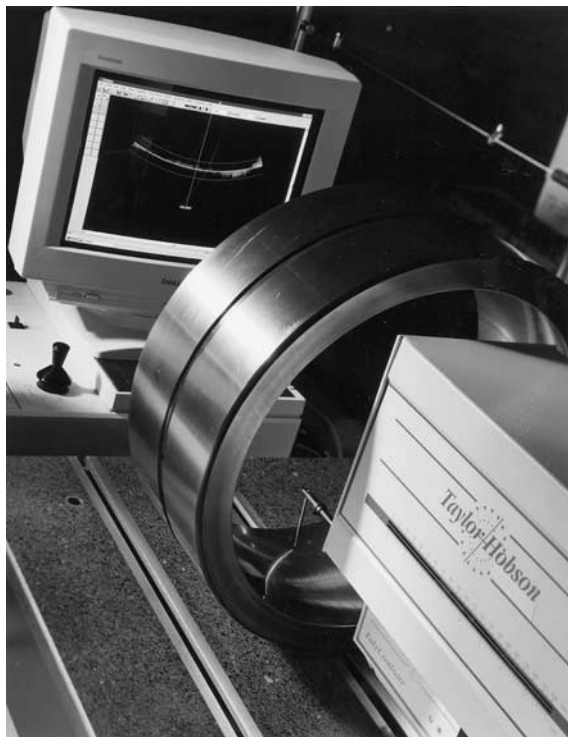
Form and surface measurement instrument “Taly-contour” being utilised to assess a spherical bearing outer race. (Courtesy of Taylor Hobson.)
